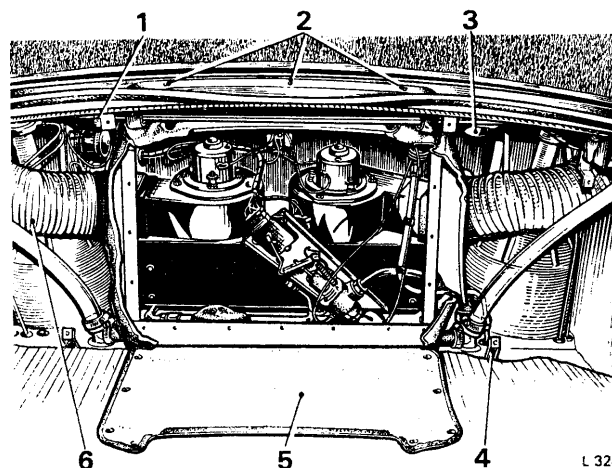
EVAPORATOR BOX WITH REAR COVER REMOVED
